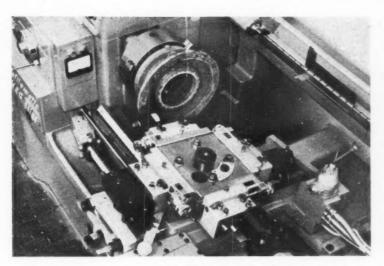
Close-up view of the Maxnovo Profilomatic 341-25 hydraulic copying lathe, showing the 4-station indexing tool turret
